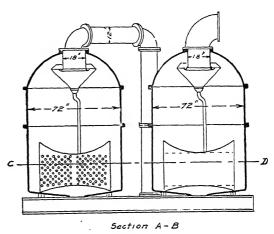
Zaremba Evaporator, Vertical Cross Section.
